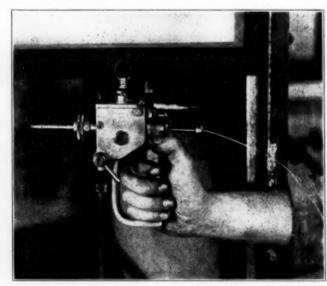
View of a Commercial Spraying Pistol in Hand Ready for use
